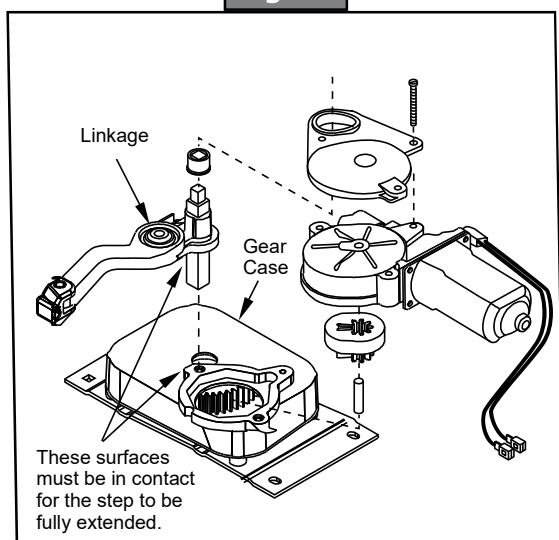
shows motor removed and some parts enlarged for clarity. Disassembly not necessary for cam adjustment.
